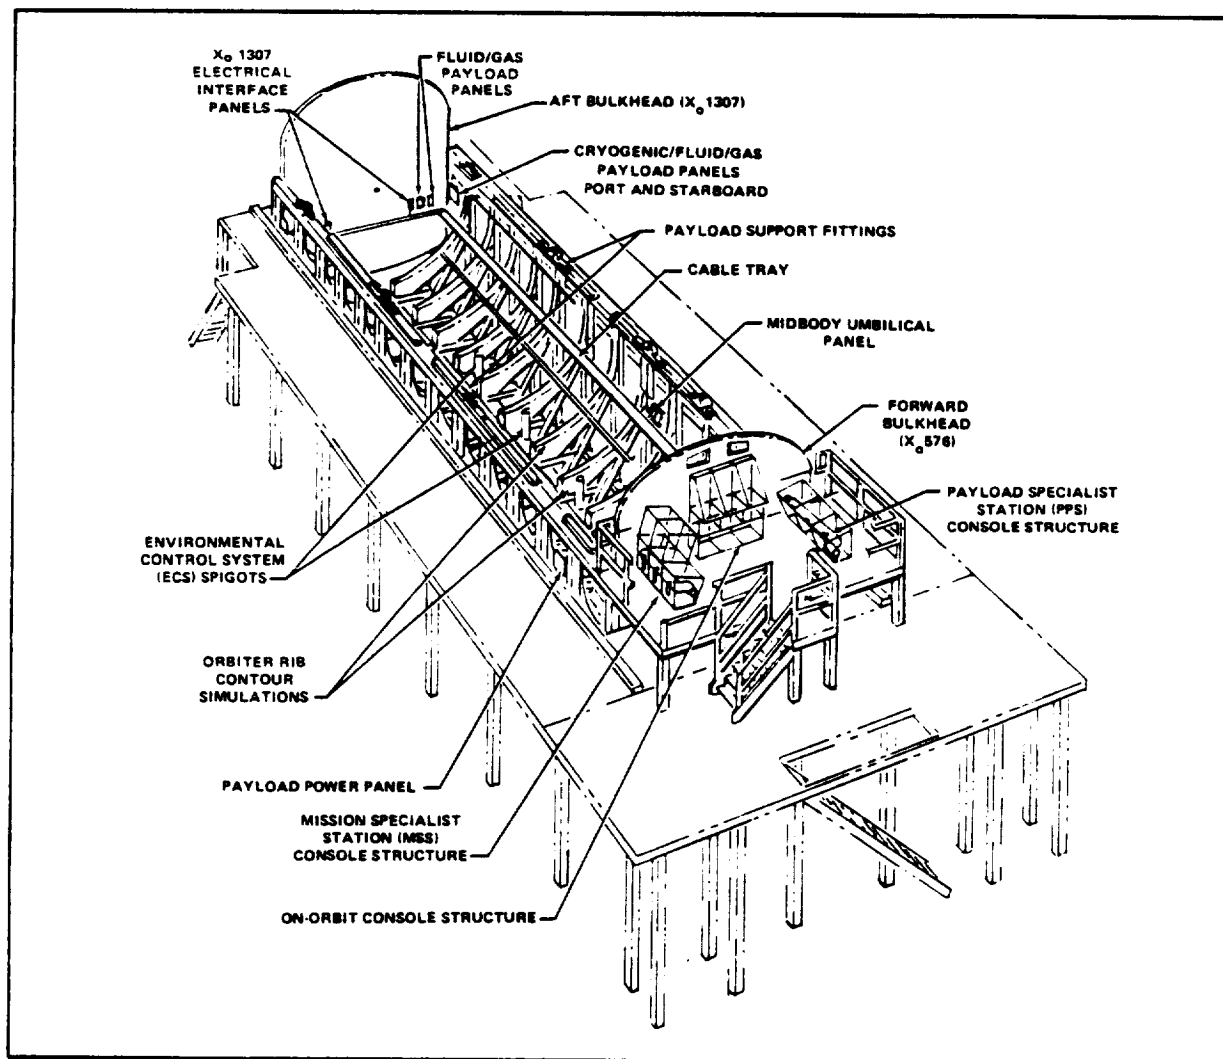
Layout of cargo integration test equipment for horizontal cargo.
